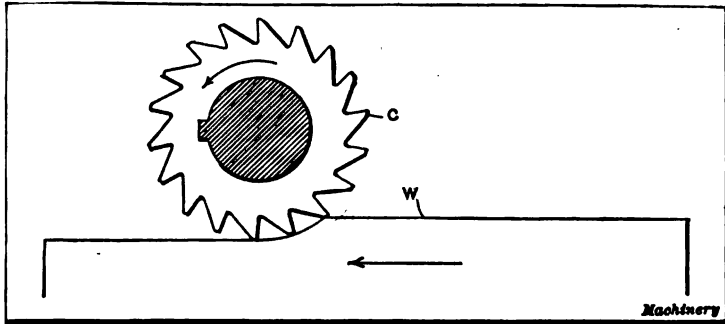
End View of Cylindrical Cutter Milling Flat Surface
